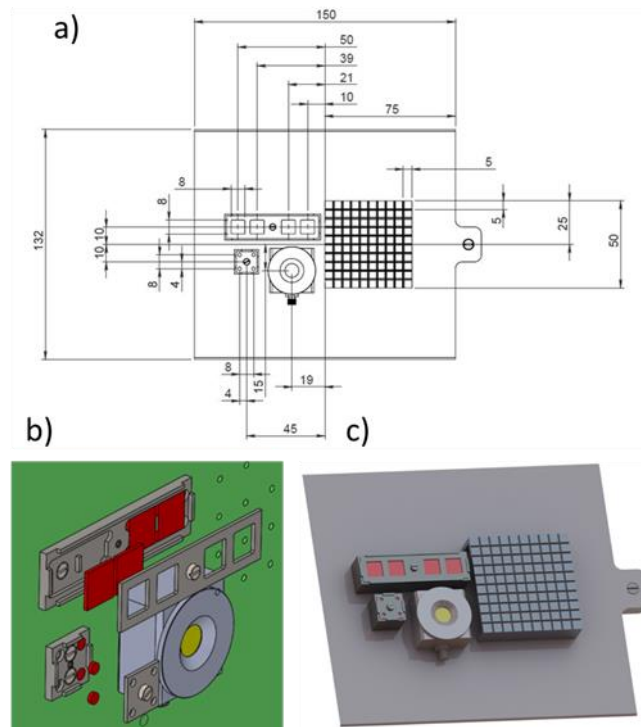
Design and assembly of the substrate holder for cluster beam deposition experiments. (a) Technical drawing of the substrate holder, showing the layout and dimensions of the substrate holder components. (b) Exploded view showing individual components, highlighting the modular design for easy assembly and customization. (c) Assembled 3D model of the substrate holder, illustrating the arrangement of components, including the positioning grid for precise beam alignment after PMCS maintenance.
